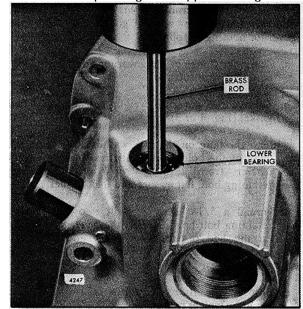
Removing Operating Shaft from Operating Shaft Lower Bearing
